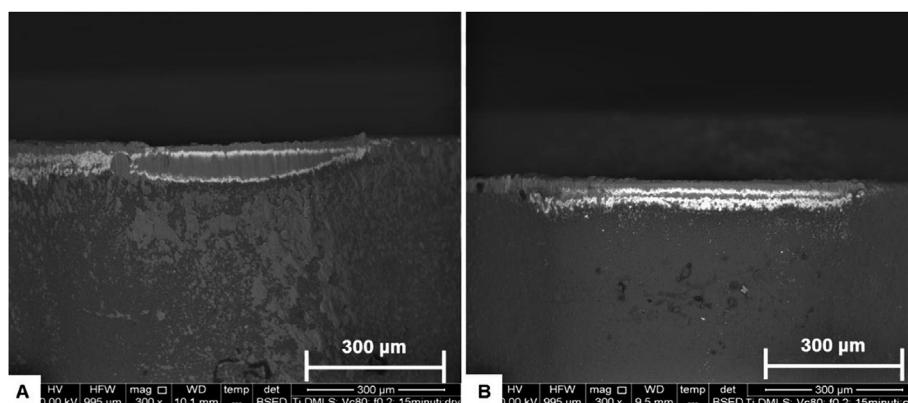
Tool flank image after 15 min when the turning of DMLS Ti–6Al–4V under (a) dry machining condition and (b) cryogenic cooling (LN₂) [74].
